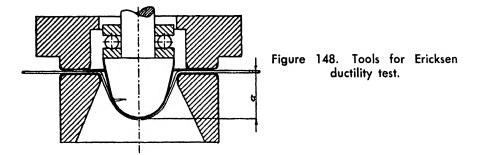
is a diagrammatic sketch of the Ericksen standard tool for testing metal sheets.
